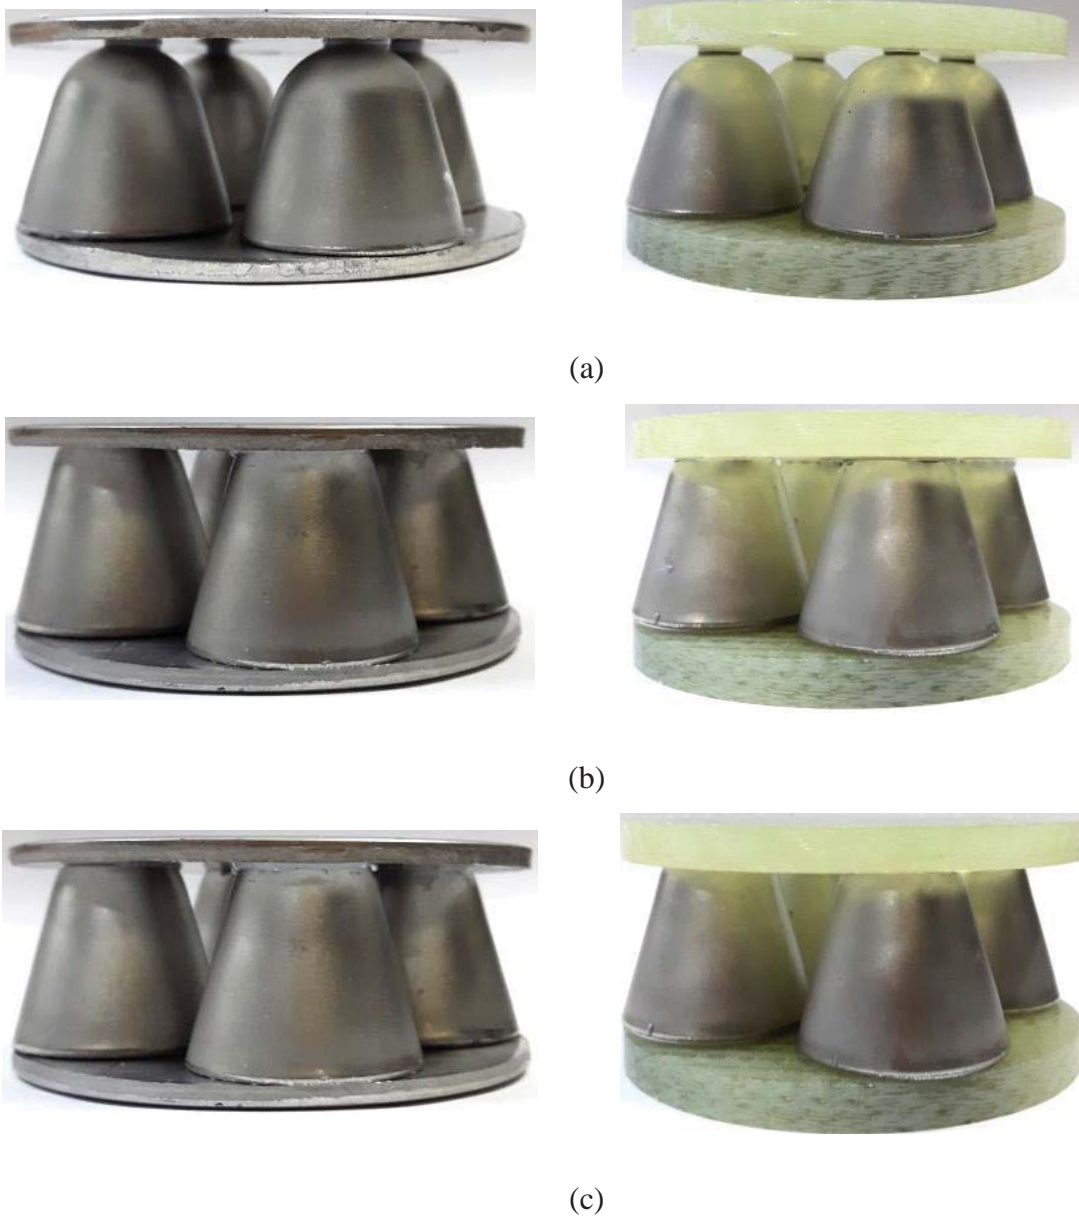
Sandwich specimens consisting of (a) only inner cores, (b) only outer shells, (c) bio-inspired geometries both with AISI 304L stainless steel and E-glass/Polyester composite facesheets.
